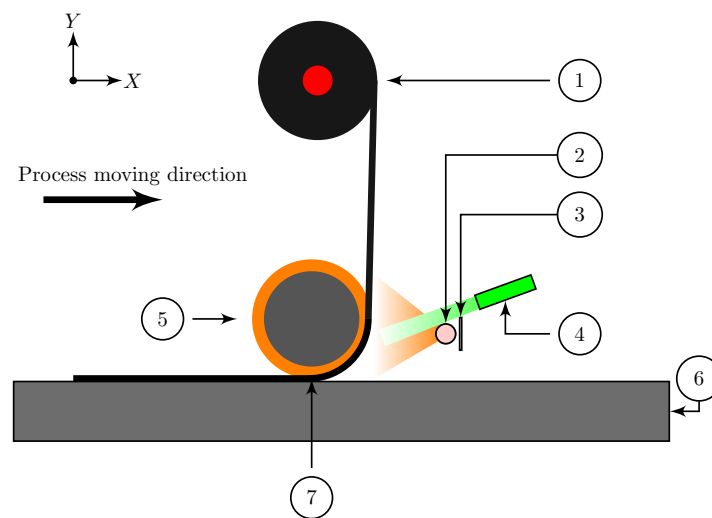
Machine head assembly. (1) material feeder. (2) heating element. (3) reflector. (4) optical temperature sensor. (5) compaction roll. (6) mold. (7) nip point.
